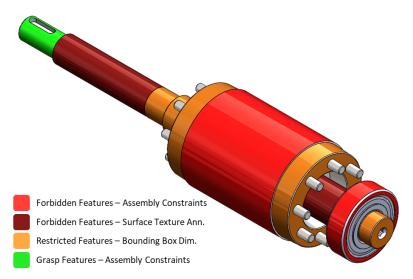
Rotor sub-assembly assembled with Housing showing bounding boxes.
